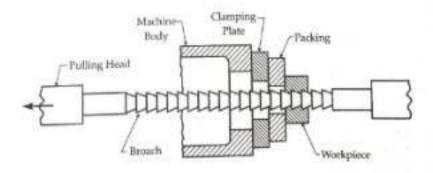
A schematic diagram showing Principle of Surface Breaching on a Pull type horizontal machine.
